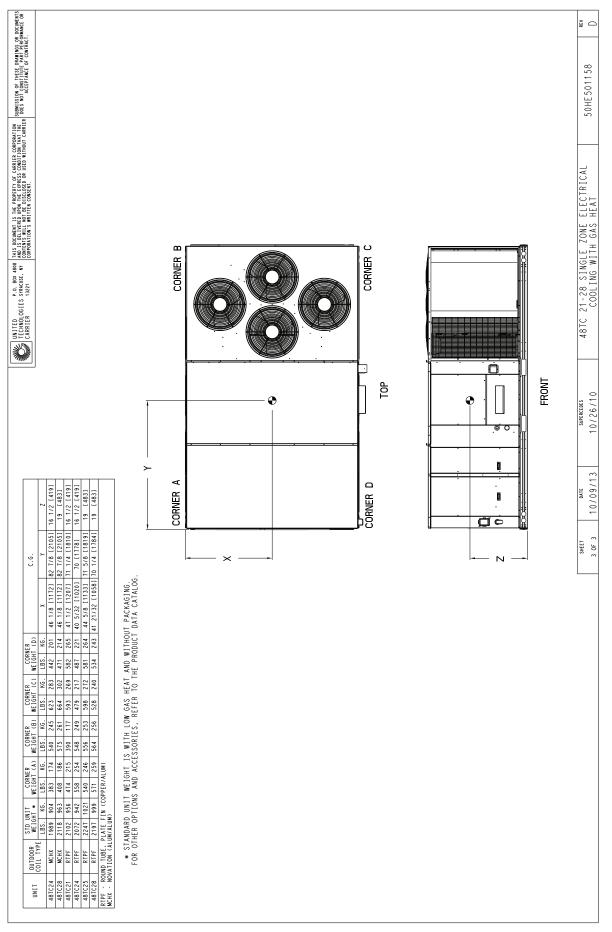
Unit Dimensional Drawing – 21 and 25 Size Units (cont.)
